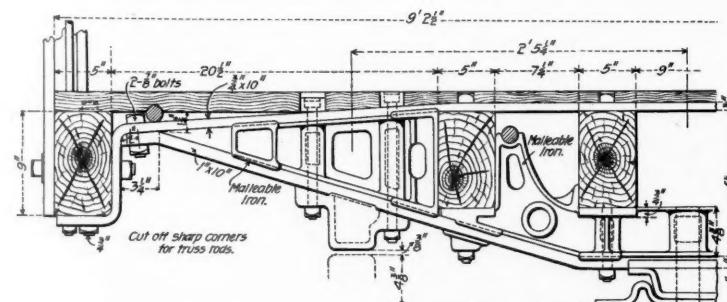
Body Bolster for 50-ft. Furniture Car—C., R. I. & P. Ry.
